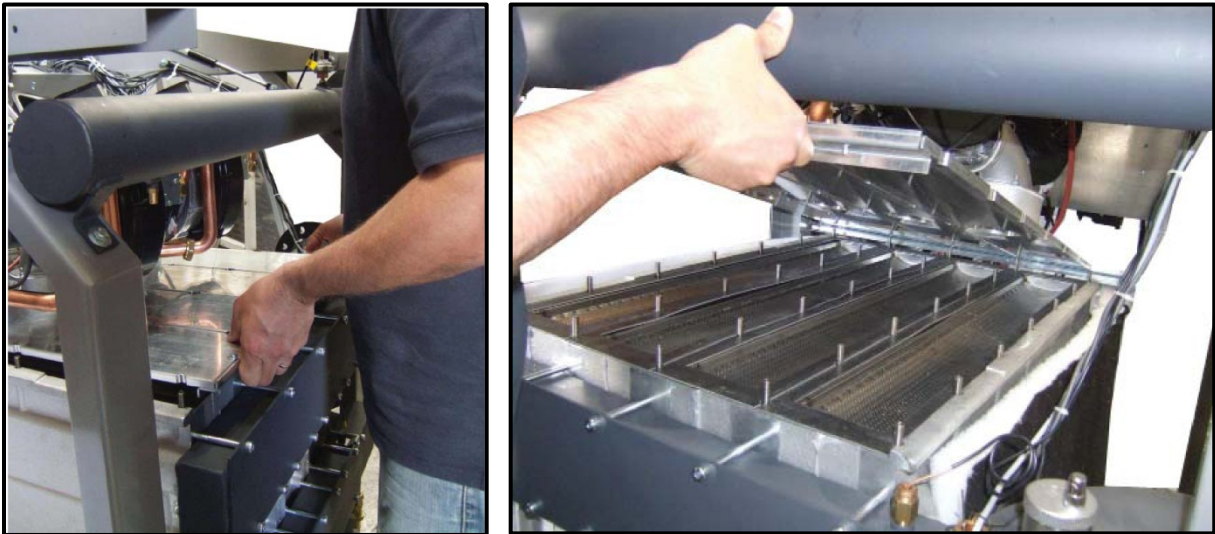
Unscrewing Lift Screw into Tab Hole (Step 10)
